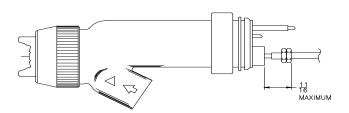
Rod and Trigger Adjustment Nuts (Do not exceed the 11/16 maximum dimension shown in this figure)
